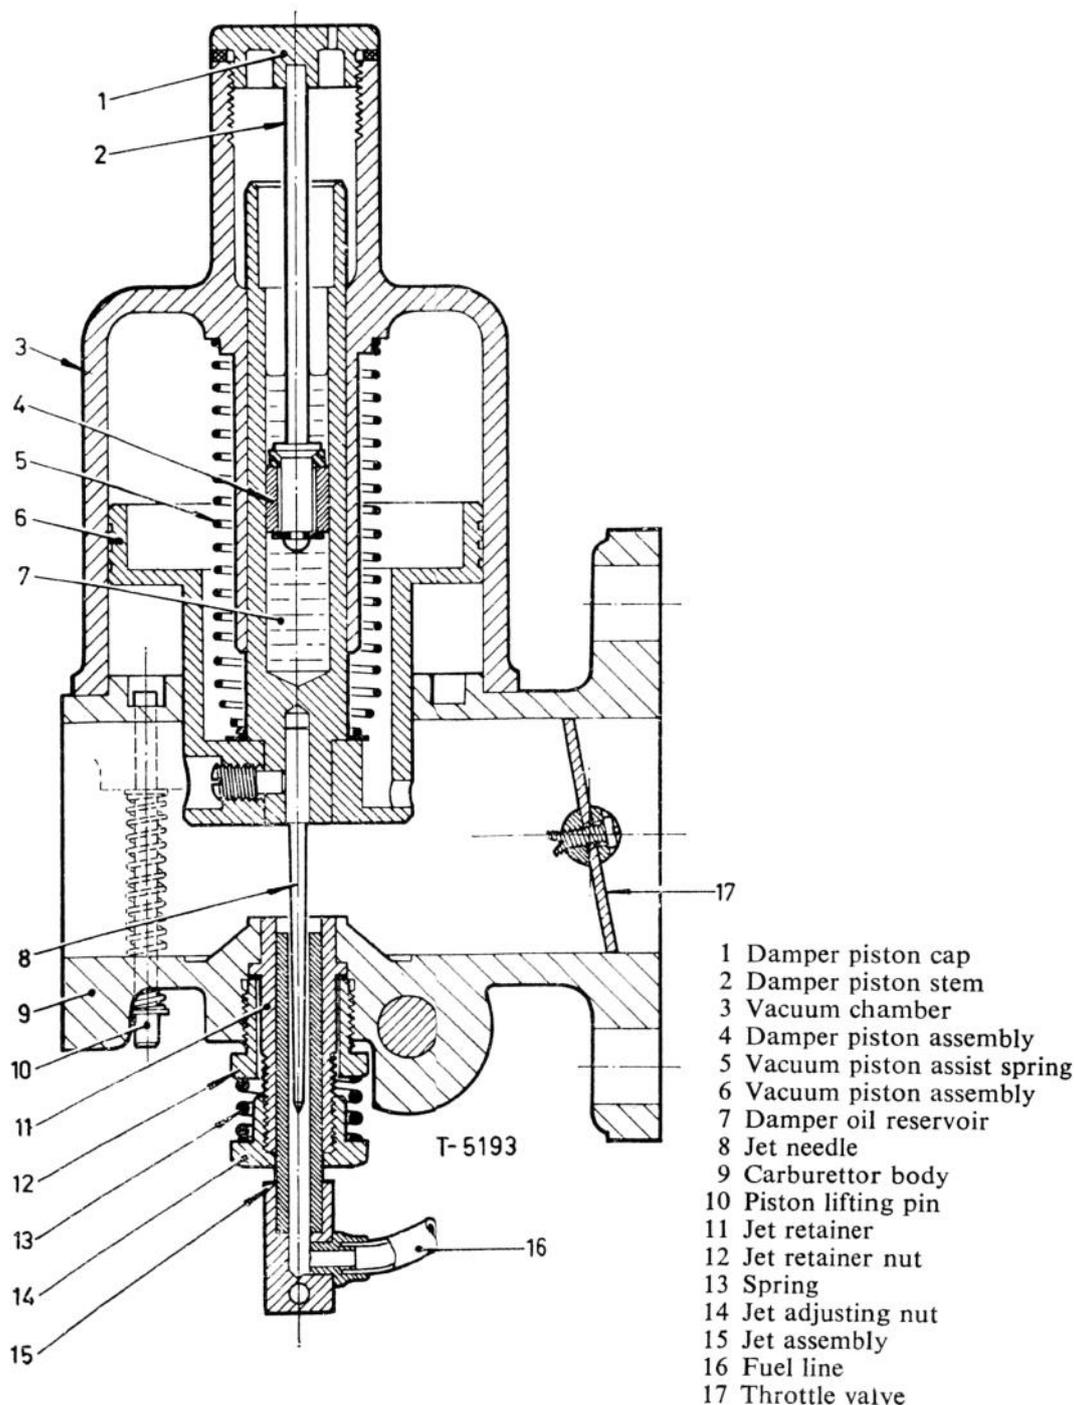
A, SU HS2 carburettor, sectioned view (typical)
